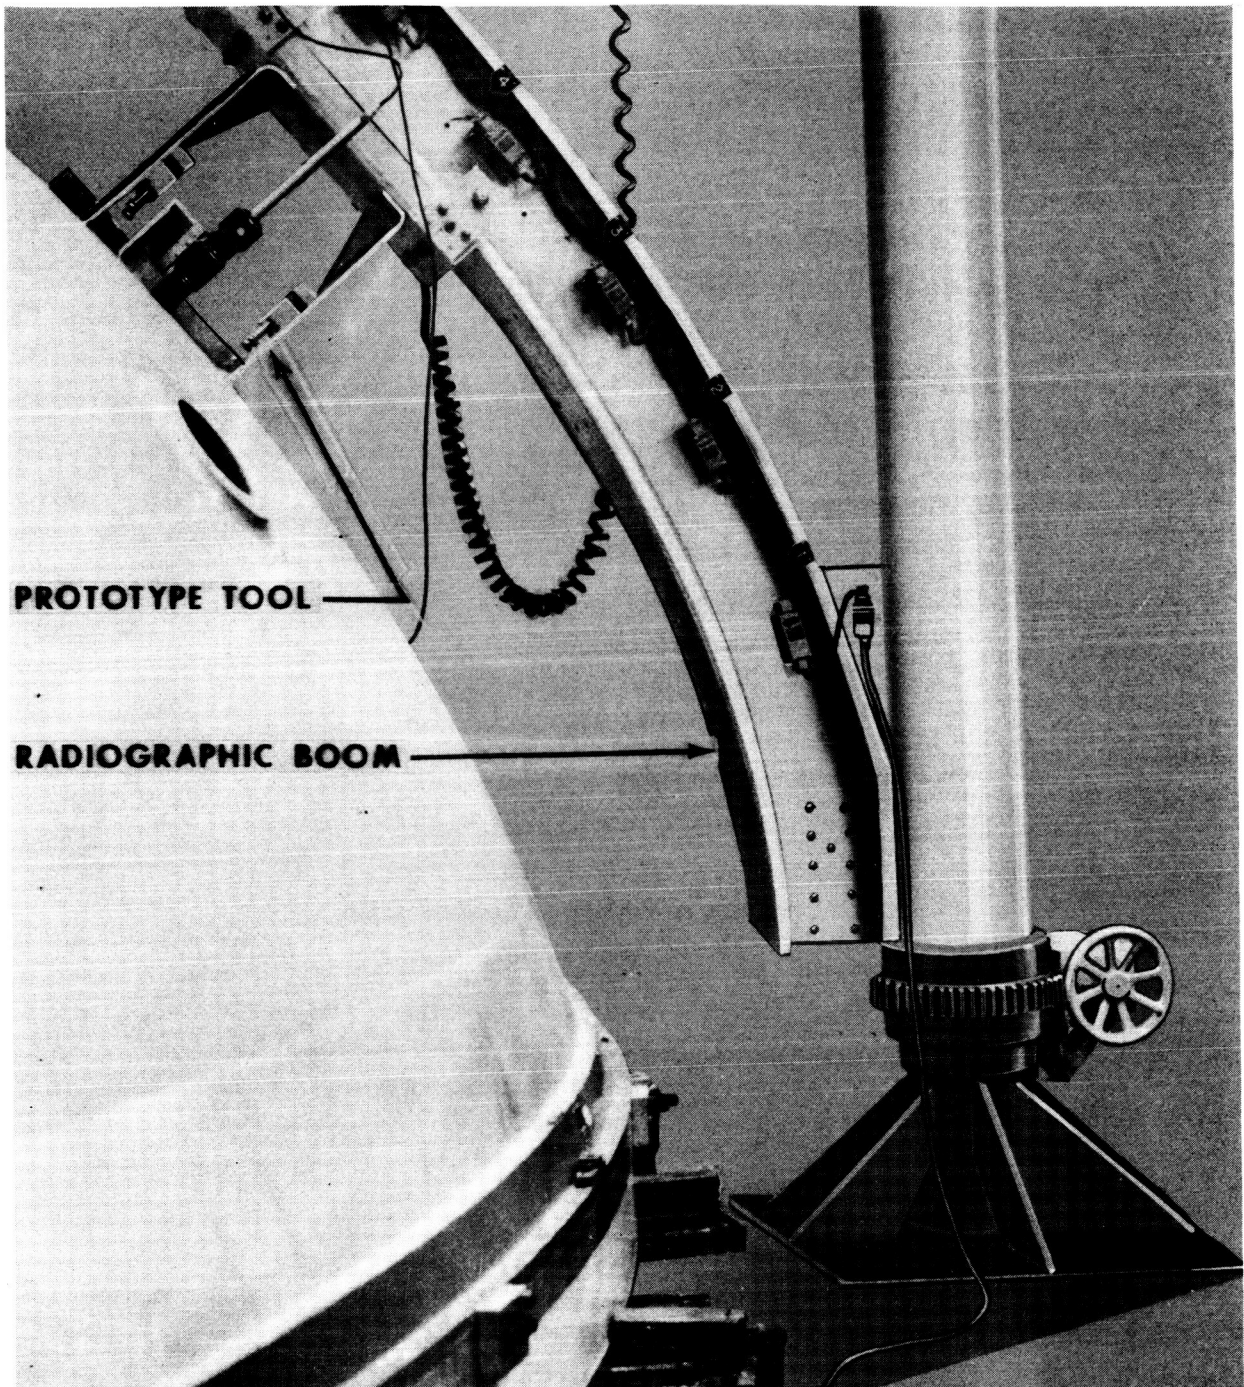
Prototype Tooling for Gore-to-Gore Weld Evaluation
